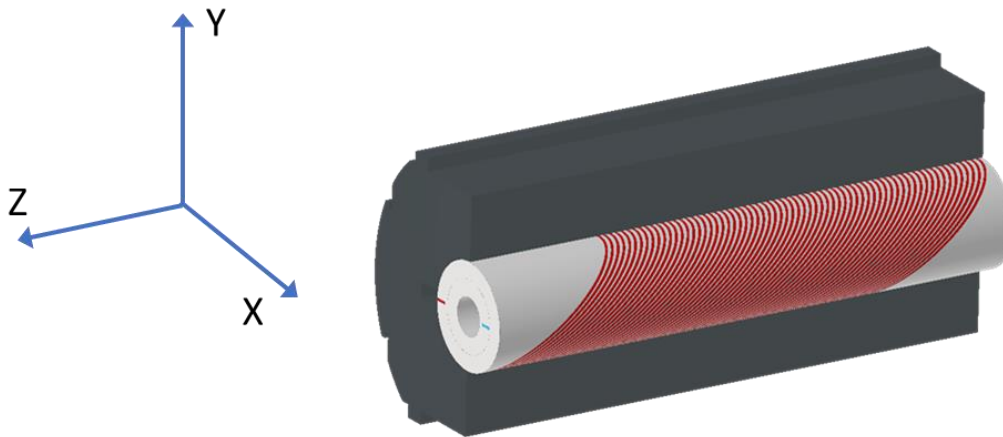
Coordinates reference system and 3D view of the CCT magnet assembly.
